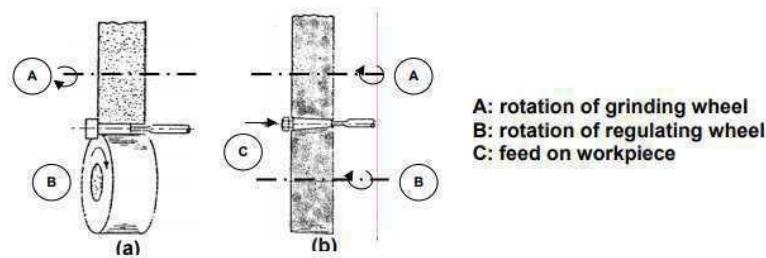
Centreless (a) infeed and (b) end feed grinding
